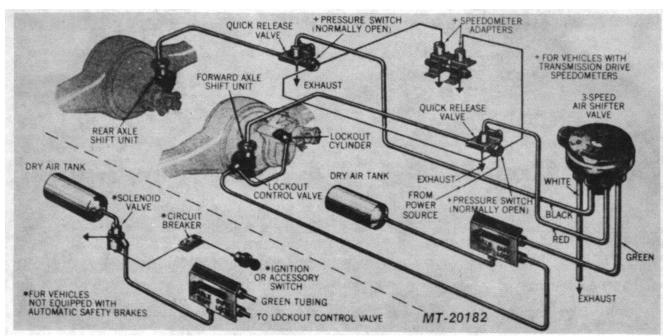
Three-Speed Tandem Axle Straight-Air Shift System.
